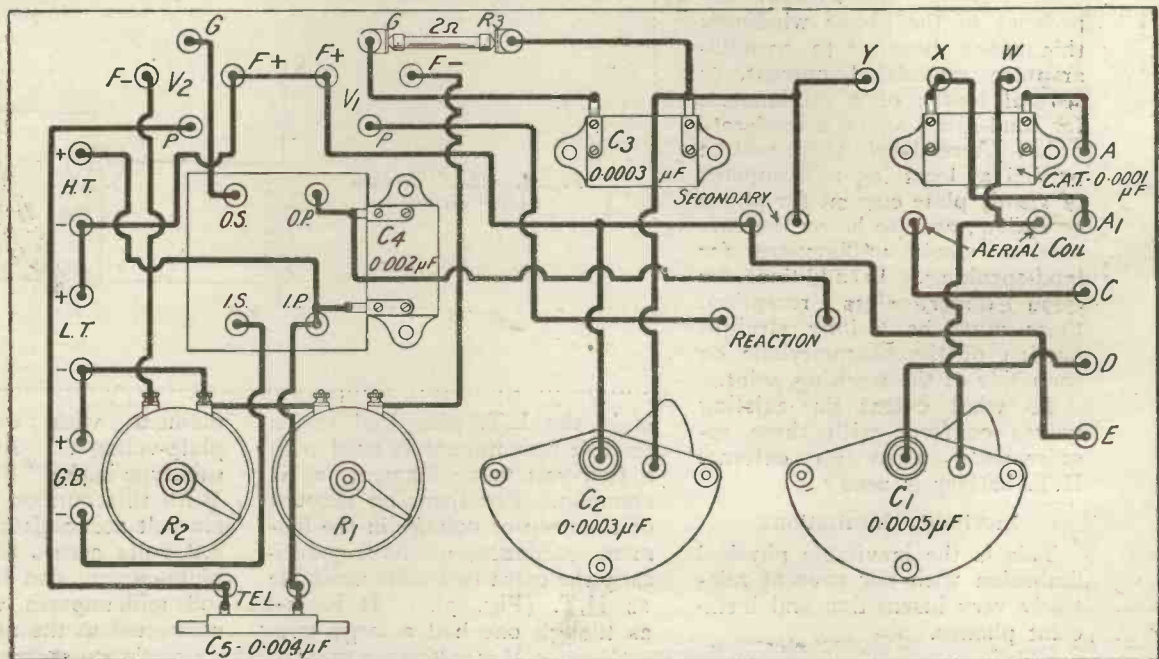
A scale drawing of the underside of the panel, showing the layout of the wiring.
